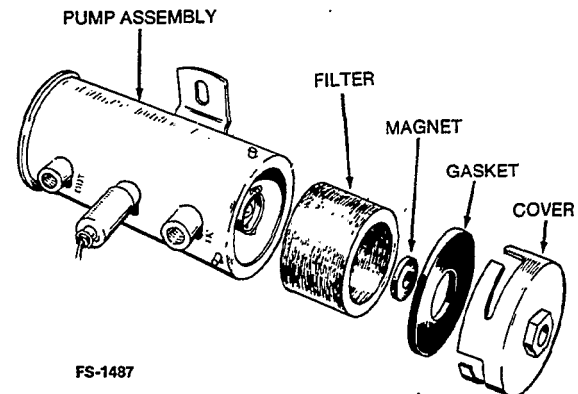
REMOVAL OF MAGNET AND FILTER
